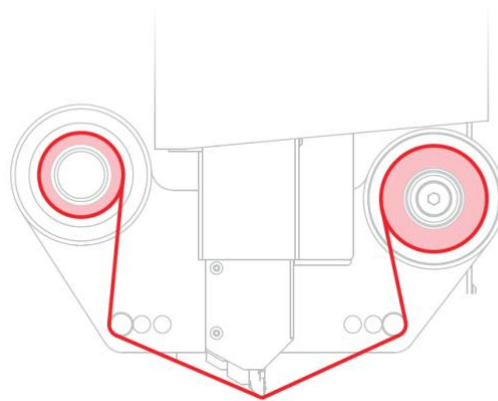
UniFoil Inserted in Head of UniFoilPrinter
